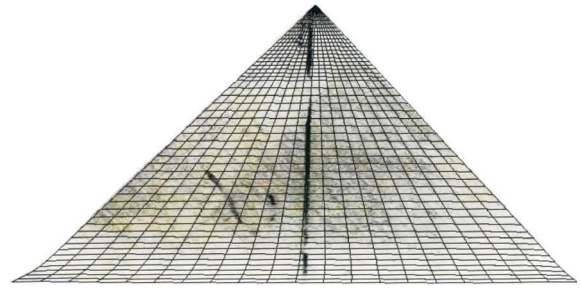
Photograph of deformed mesh and formed shape of the workpiece in the V-bending process.
